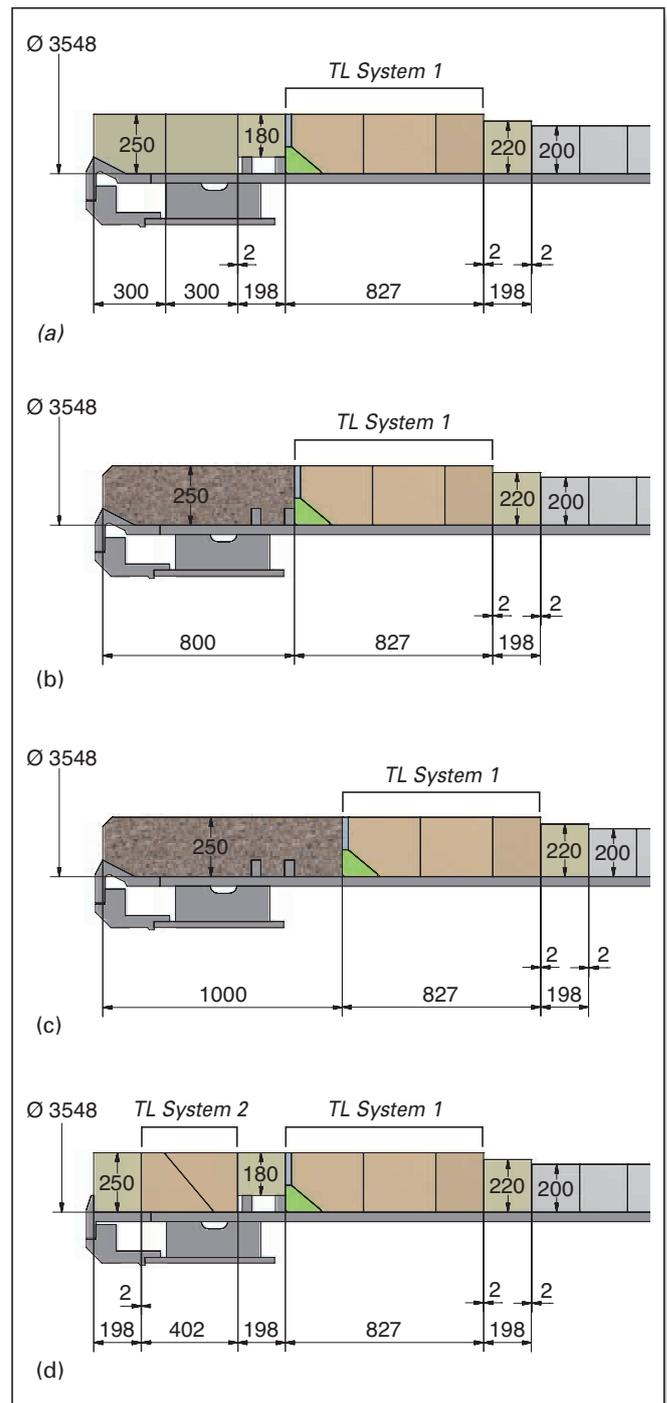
Different lining concepts: Thrust Lock (TL) System and (a) brick lining at the outlet, (b) monolithic outlet, (c) extended monolithic outlet, and (d) second TL System step. Dimensions are in mm.
